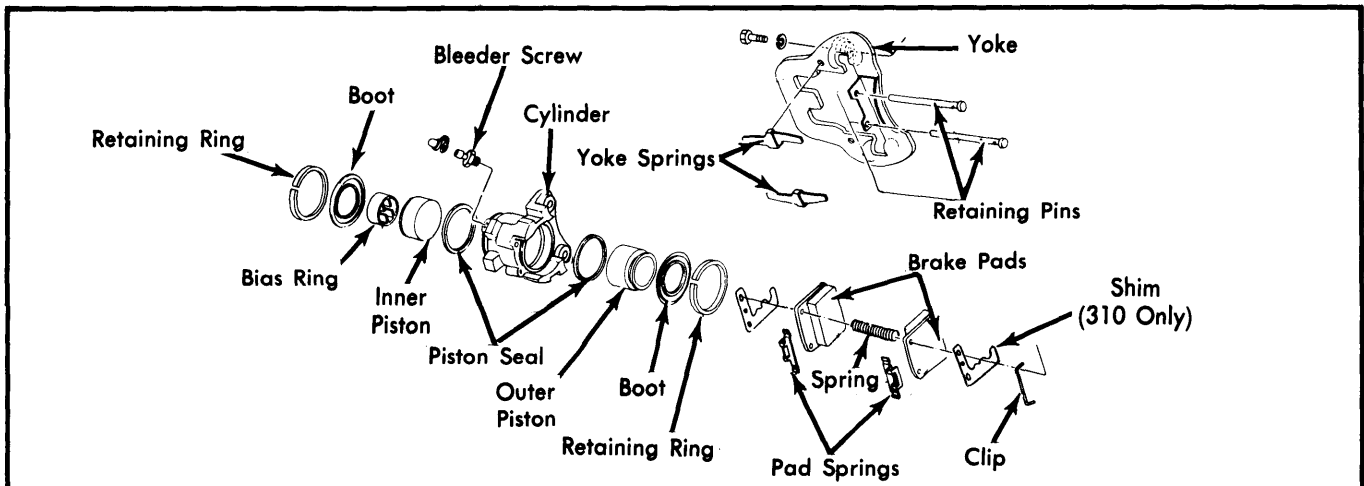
Exploded View of Front Disc Brake Caliper (200SX, 210 & 310 Models)
